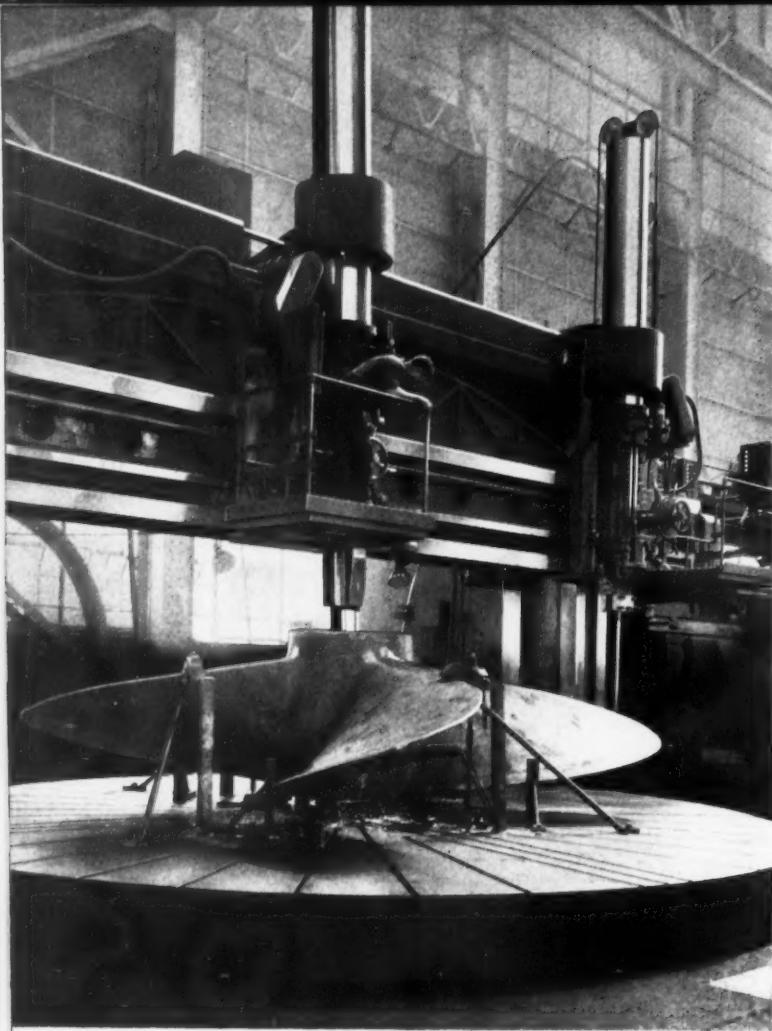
Machining the Taper Bore in an 18-foot Propeller on a Large Vertical Boring Mill
